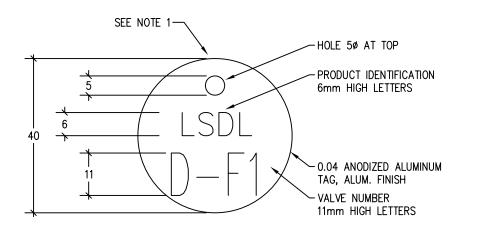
<u>VALVE TAGS FOR DIESEL FUEL SYSTEM</u>
